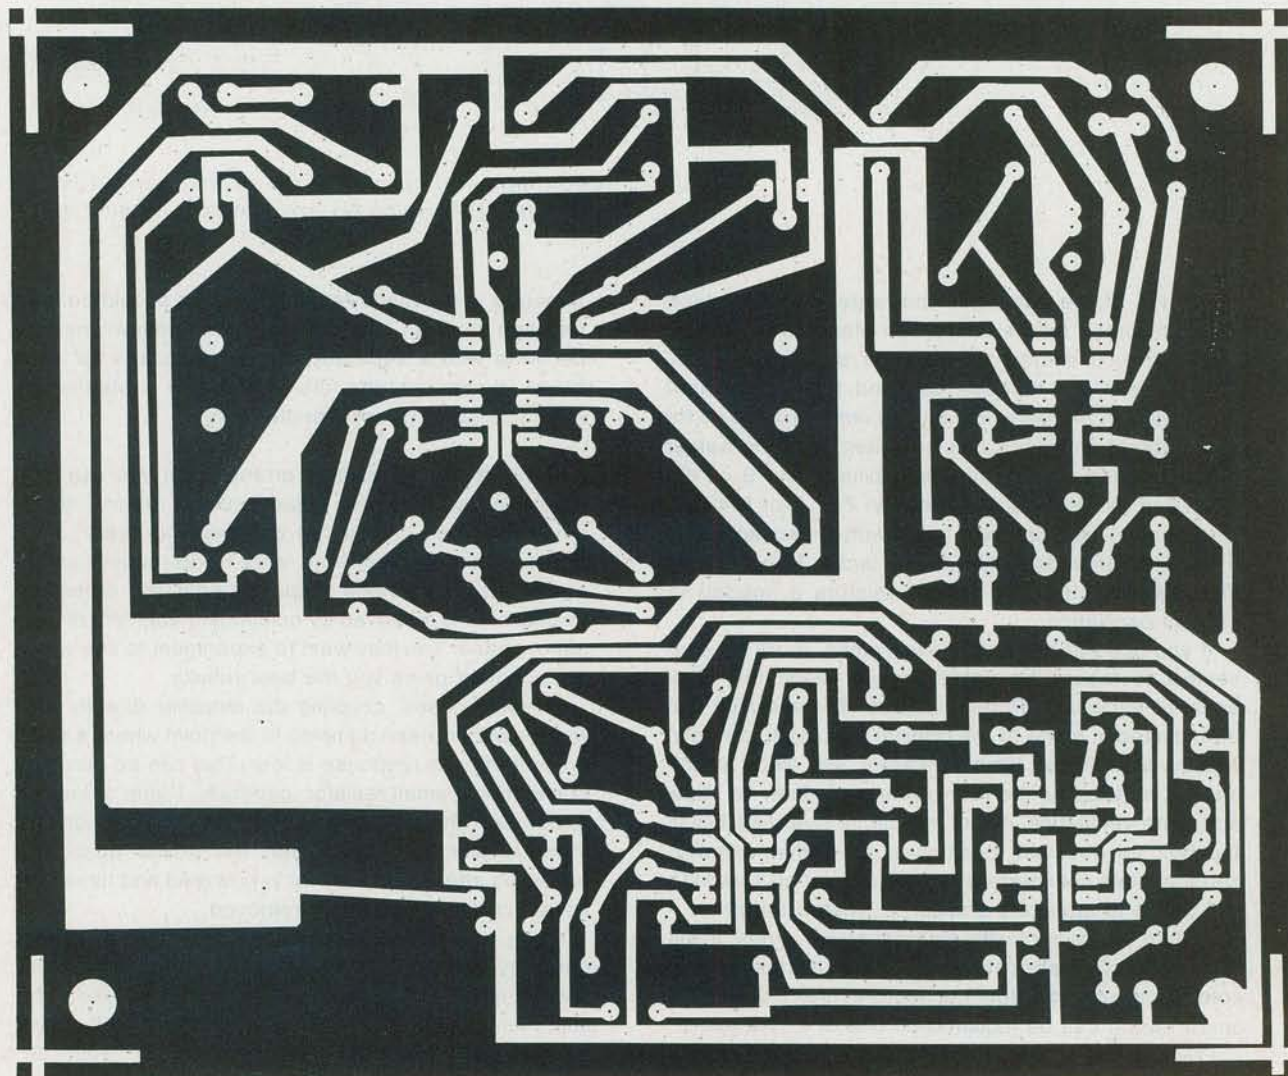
Actual-size etching and drilling guide for printed circuit board.
